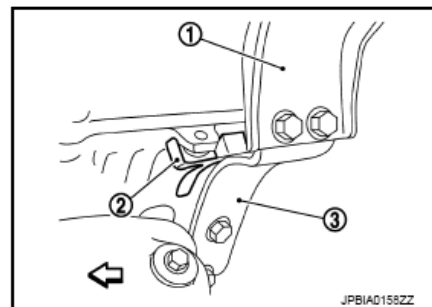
Identifying Engine Rear Upper And Lower Slinger, Spacer
